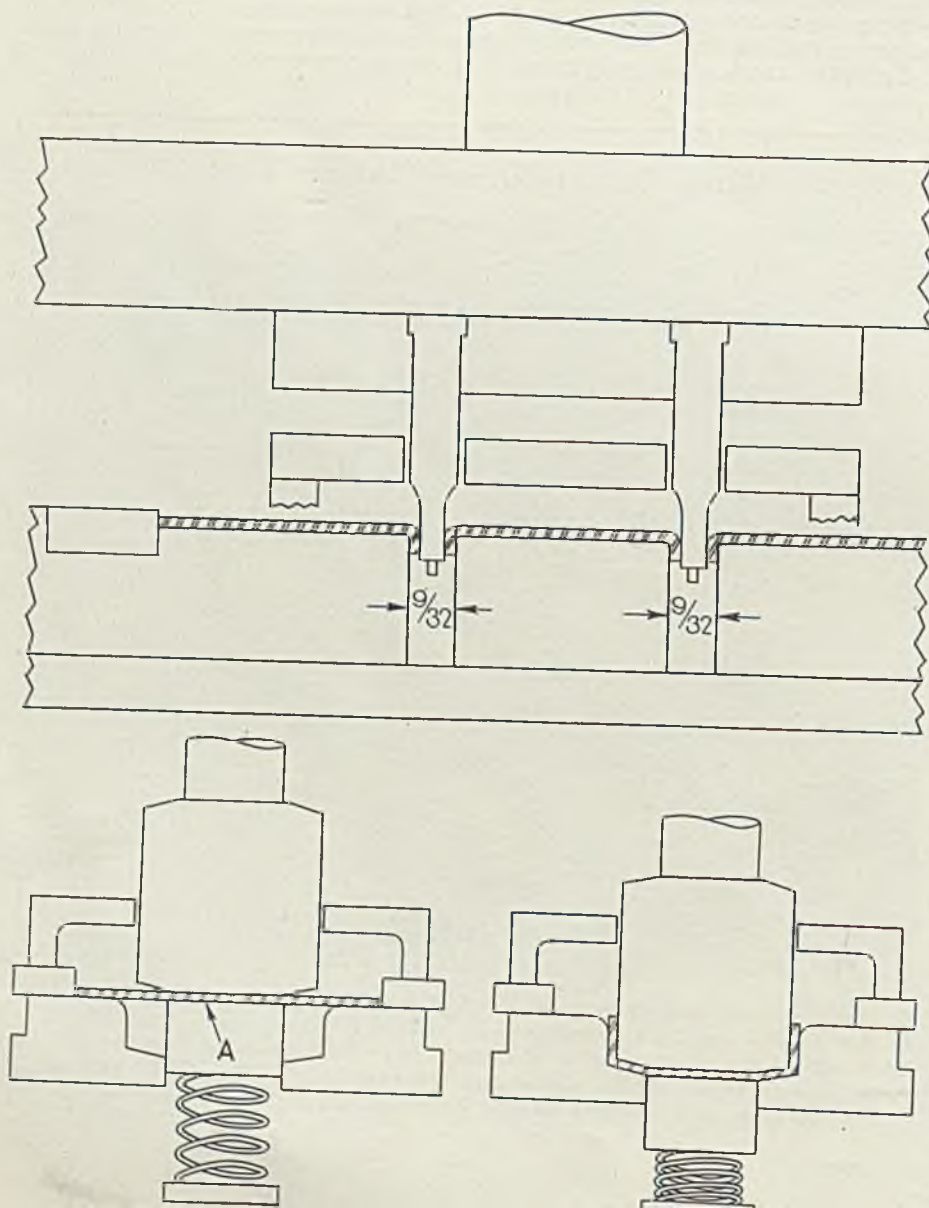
(Top)—Extruding punch at end of stroke having pierced and extended four holes in sheet metal and blanked a large hole simultaneously. Fig. 2 (Left below)—Conduit base in forming die ready for forming stroke. Fig. 3 (Right below)—Forming die with punch at end of stroke
